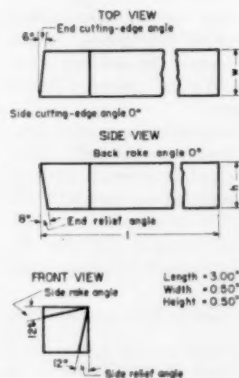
SHAPE OF THE HIGH-SPEED-STEEL TOOLS USED IN ALL MACHINING TESTS
